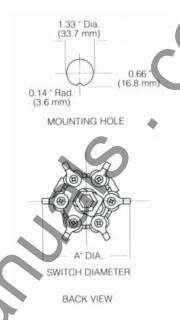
Two and Three-Phase Mounting Hole and Switch Diameter.
